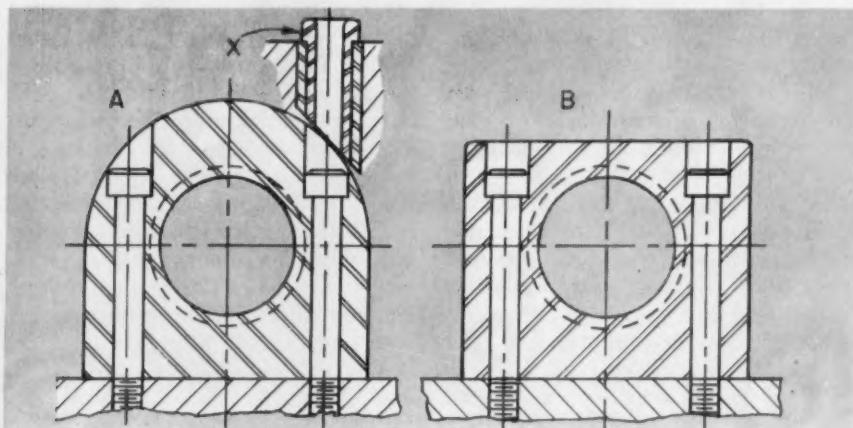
(A)—Rounded surface of adjusting screw nut requires use of special drill jig bushings.
